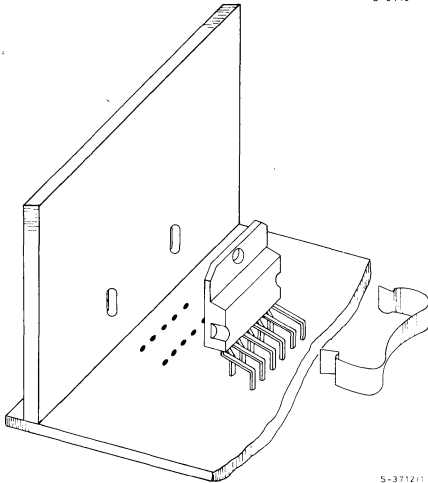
MULTIWATT, PENTAWATT and VERSAWATT packages are attached to the heat-sink with a single screw or a spring clip.
